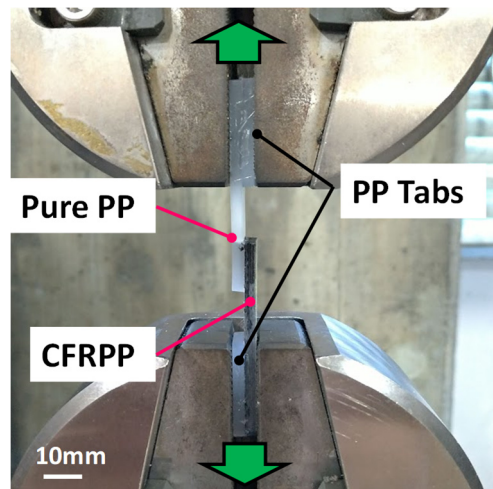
Over viewing of tensile shear test for specimen of single-lap joint.
